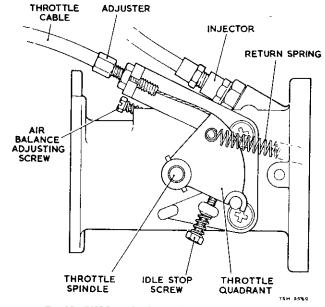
THROTTLE BODY - ADJUSTMENT POINTS
